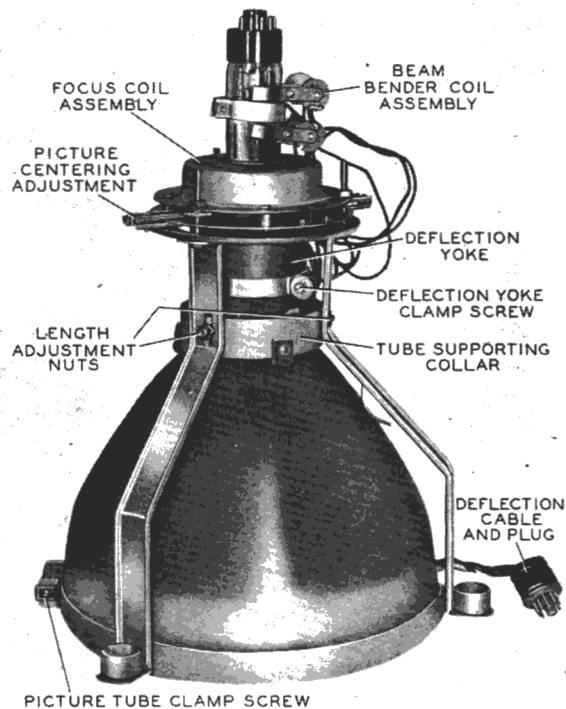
COMPLETED PICTURE-TUBE ASSEMBLY
